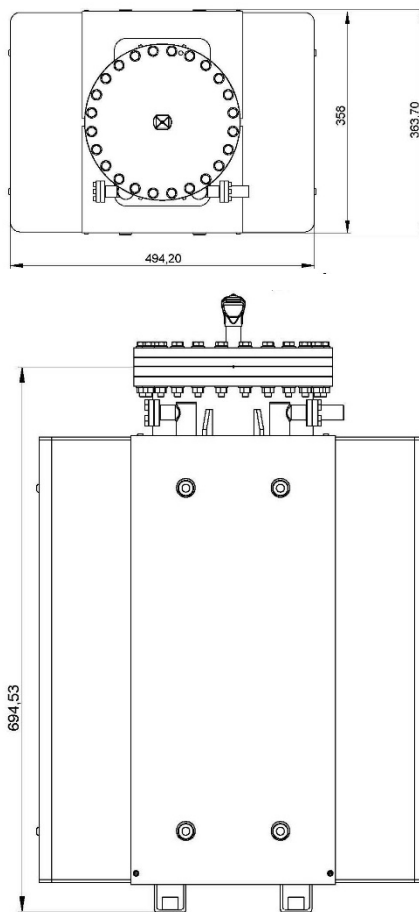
Vaclon Plus 800 CFF 10" outline drawing, showing pump overall dimensions (in mm)
